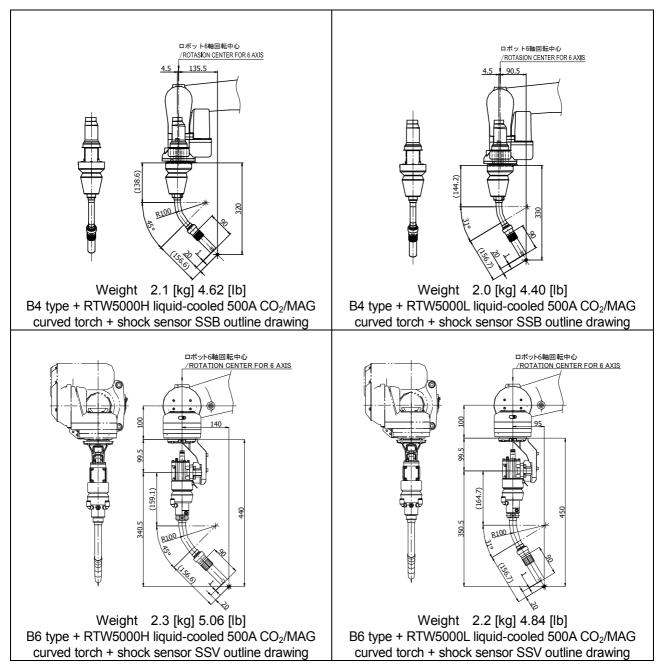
Outline drawing of Liquid-cooled 500A torch (for B4 type, B6 type) Unit (mm)
